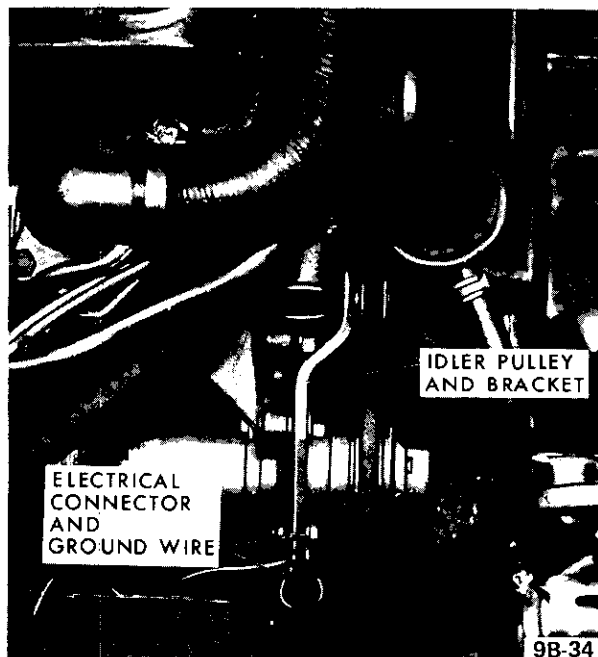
B-51 Location of Idler Pulley, Bracket and Ground Wire Opel 1900 Manta
